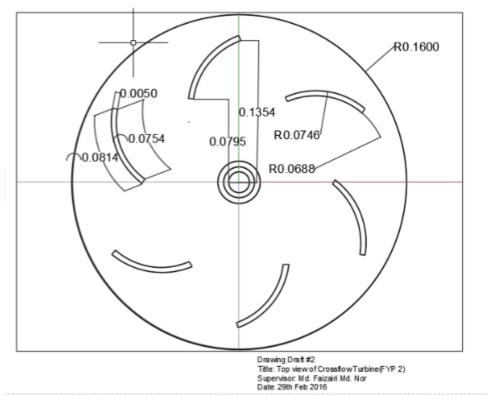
Draft 2 of Cross-Flow Turbine- Top View (using AutoCAD)
